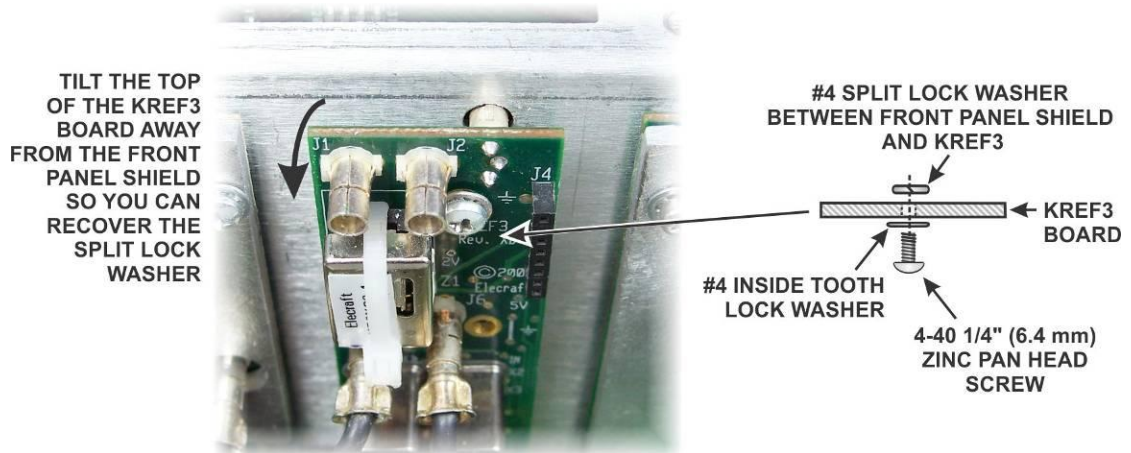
Removing the KREF3 Board (No K3EXREF Option Installed)
